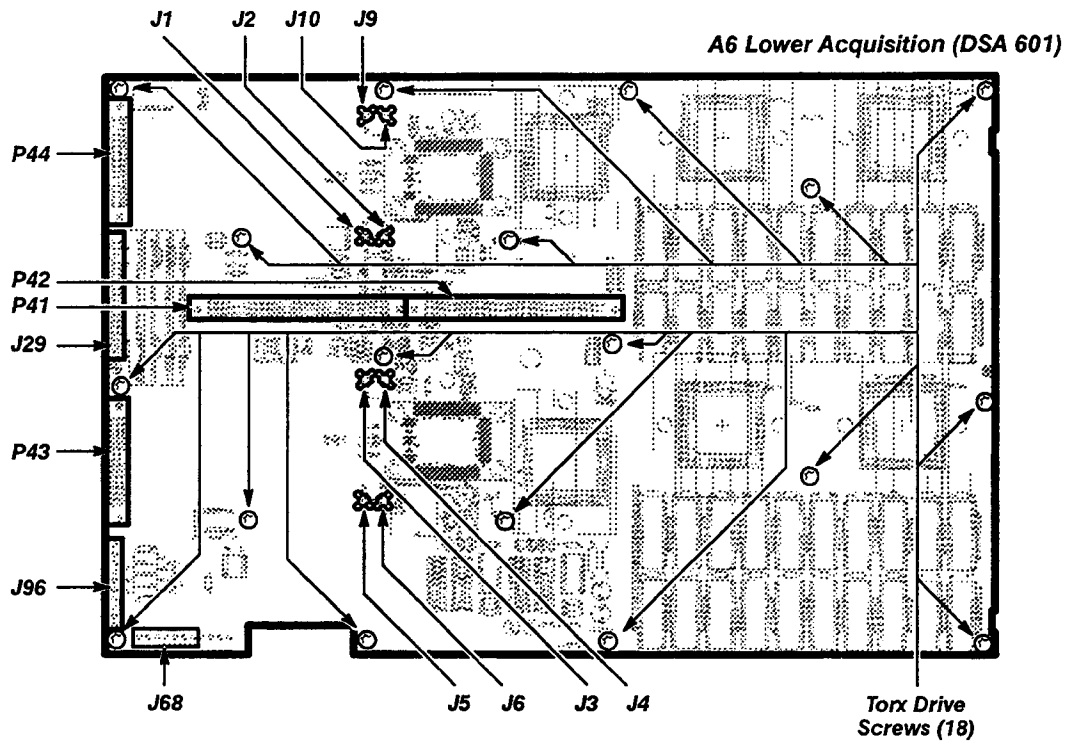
Removing/Replacing the A6 Lower Acquisition Board
